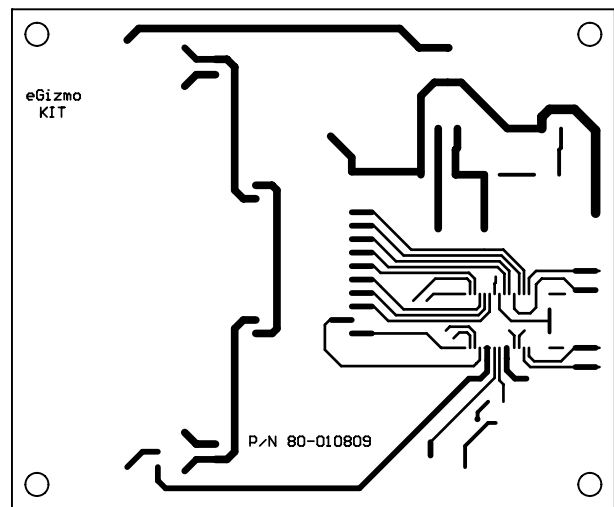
Micro-Step Stepper Motor Driver PCB Copper Pattern (Bottom Layer)
